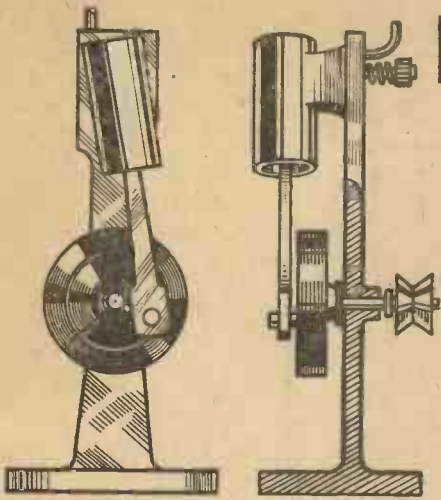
Simple oscillating steam engine showing overhung crank.
